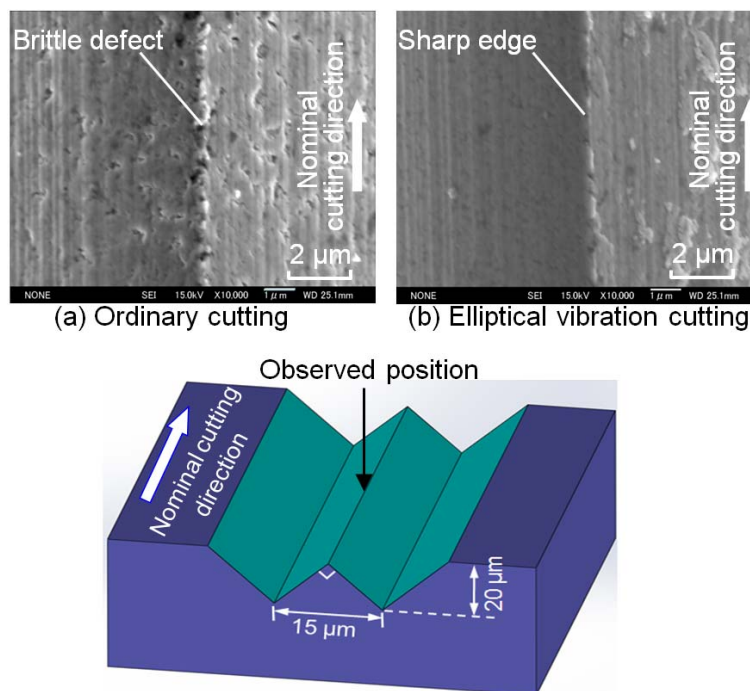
V-grooved surface with sharp edge fabricated by elliptical vibration cutting
